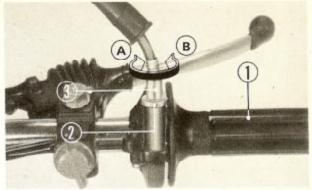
1 Throttle grip 2 Lock nut 3 Throttle cable adjuster
